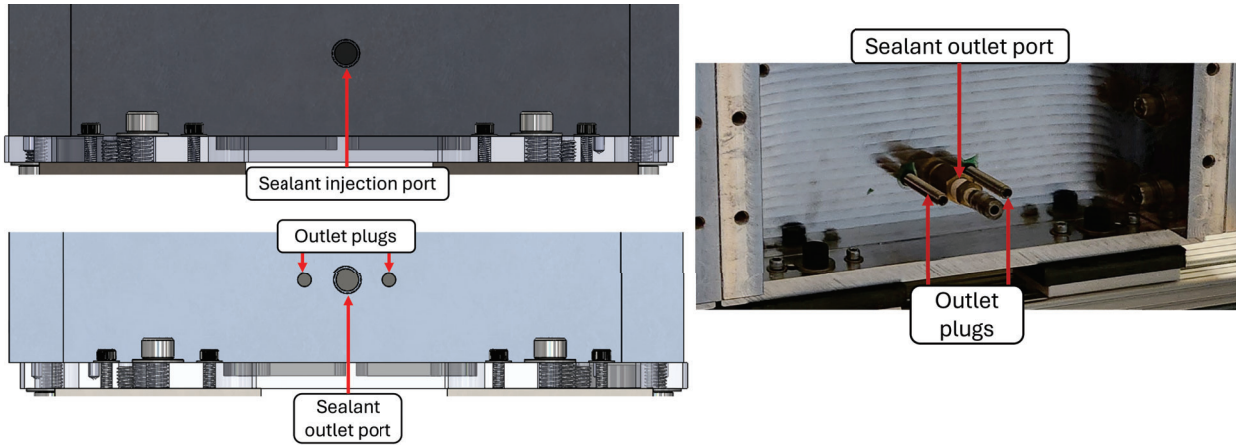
The side where sealant is injected includes A) a single 1/8 NPT threaded hole which connects to an adapter used for sealant injection. On the outlet side, B) the same 1/8 NPT threaded hole is used to monitor sealant flow for air bubbles. C) Two 1/4-20 threaded holes are used with threaded plugs to ensure sealant flows around both sides of the groove.
